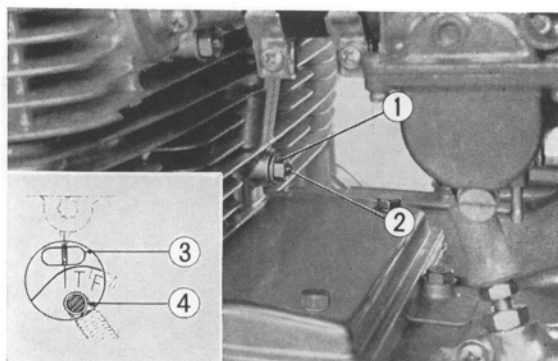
① Nut ② Adjusting screw ③ Timing mark ④ Spring peg
